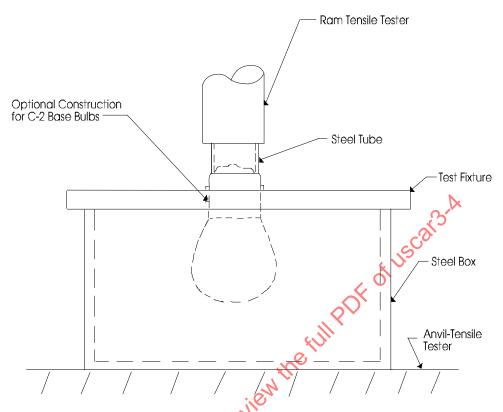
Pin Removal Test Fixture (B-1, B-2, and C-2 Base Types)
